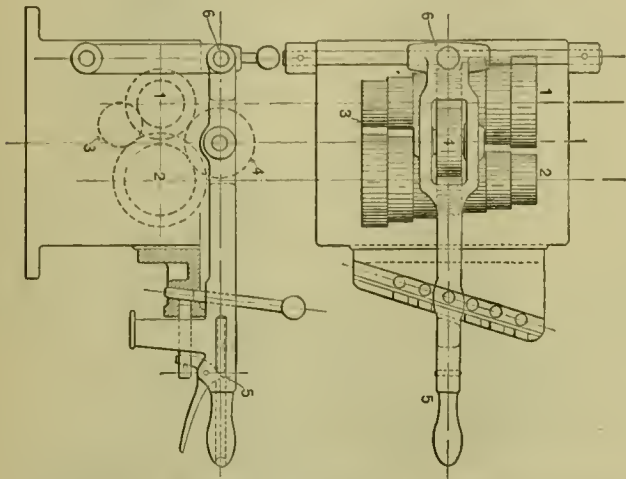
DETAILS OF THE MAIN DRIVE VARIABLE-SPEED MECHANISM USED UPON THE NEW DESIGN OF DRESSES RADIAL DRILL.
